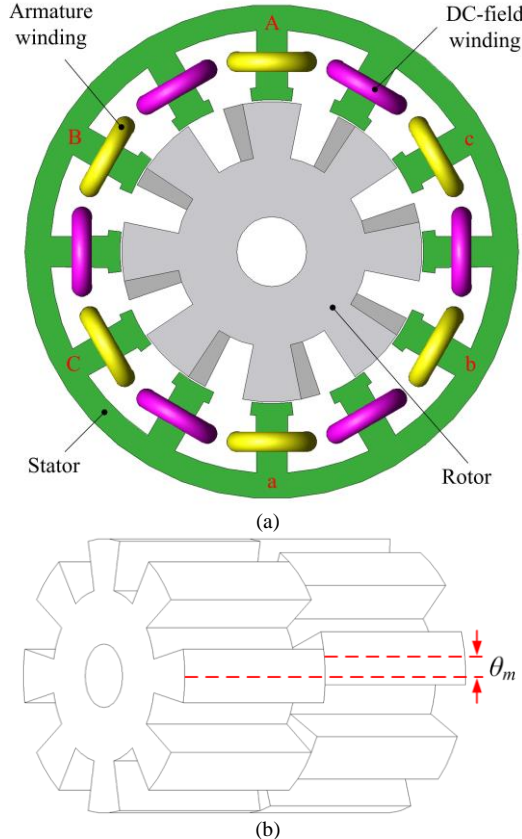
Proposed MO machine with cascade structure. (a) Machine. (b) Rotor.
